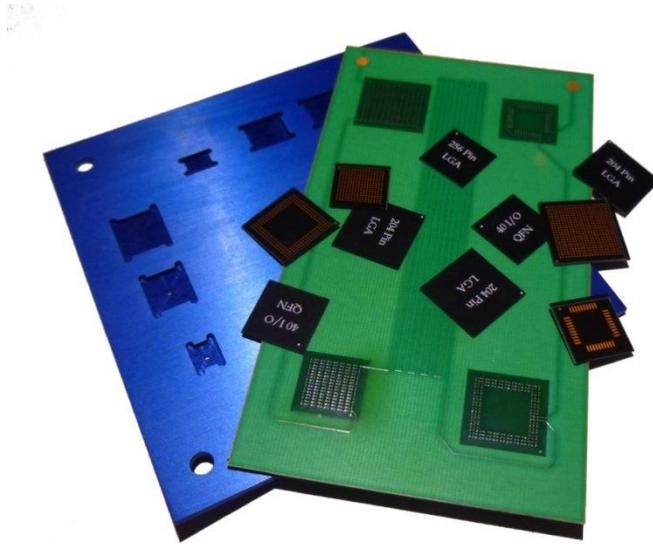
Aluminum is a viable alternative to customarily used laminates when solder is not used to make interconnections between components and circuits. Aluminum is unique in that its surface can be anodized creating an insulation layer of alumina which can be colored and sealed. All components shown have a purposely selected 0.5mm contact pitch for design reasons which is discussed in the body of the paper.
